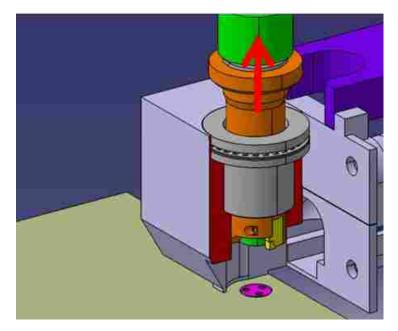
With Flash Removed Driver/Flash Cutter Assembly Move Up For Reload
